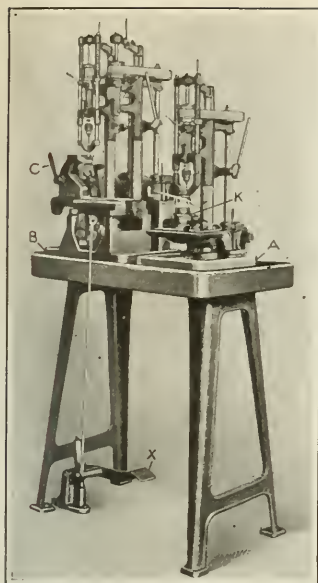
Gang and Single-spindle Drilling Machines for drilling Fuse Body, showing Work in Position
